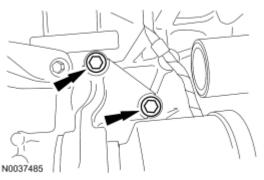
Locating RH Halfshaft Carrier Bearing Bracket Bolts Courtesy of FORD MOTOR CO.
